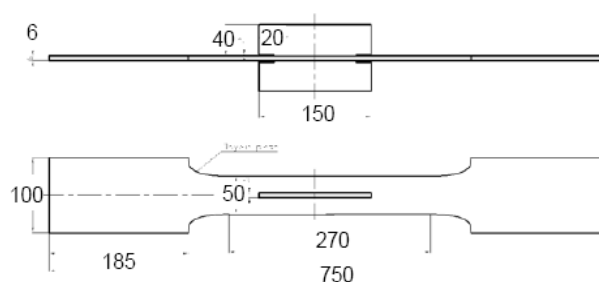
Specimen geometry for fatigue testing of 960 MPa yield strength steel welded elements [12]
